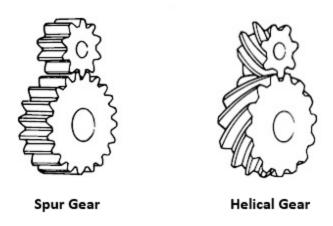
, Spur Gear and Helical Gear (Kohara Gear Industry Co., Ltd., 2015)
